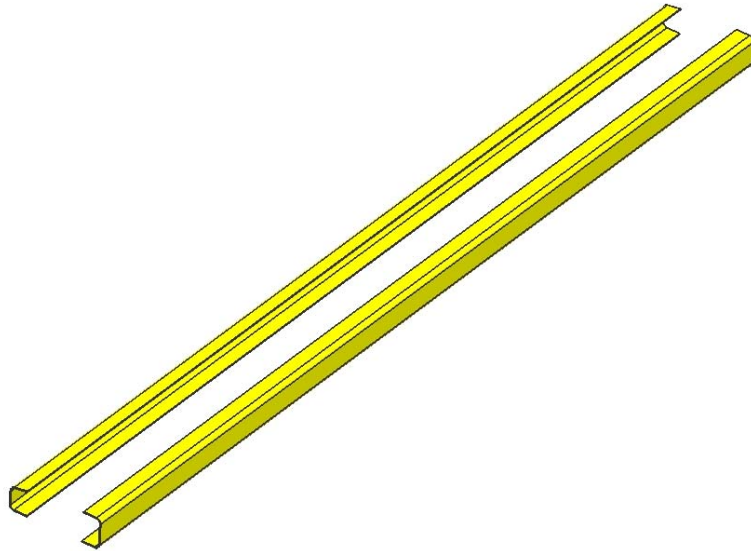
Front and Rear Spar of Aluminum Wing Model
